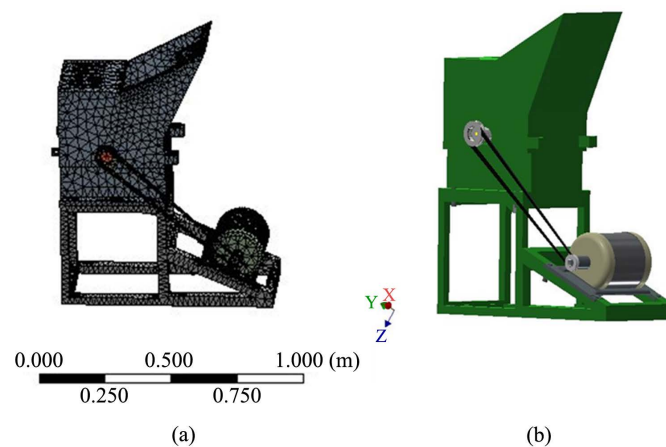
3D Minimized view of the machine (a) tetrahedral mesh model with 1091525 nodes and 735258 elements and (b) external components consisting of the electric motor, driving shaft, belt, the base and the hopper.
